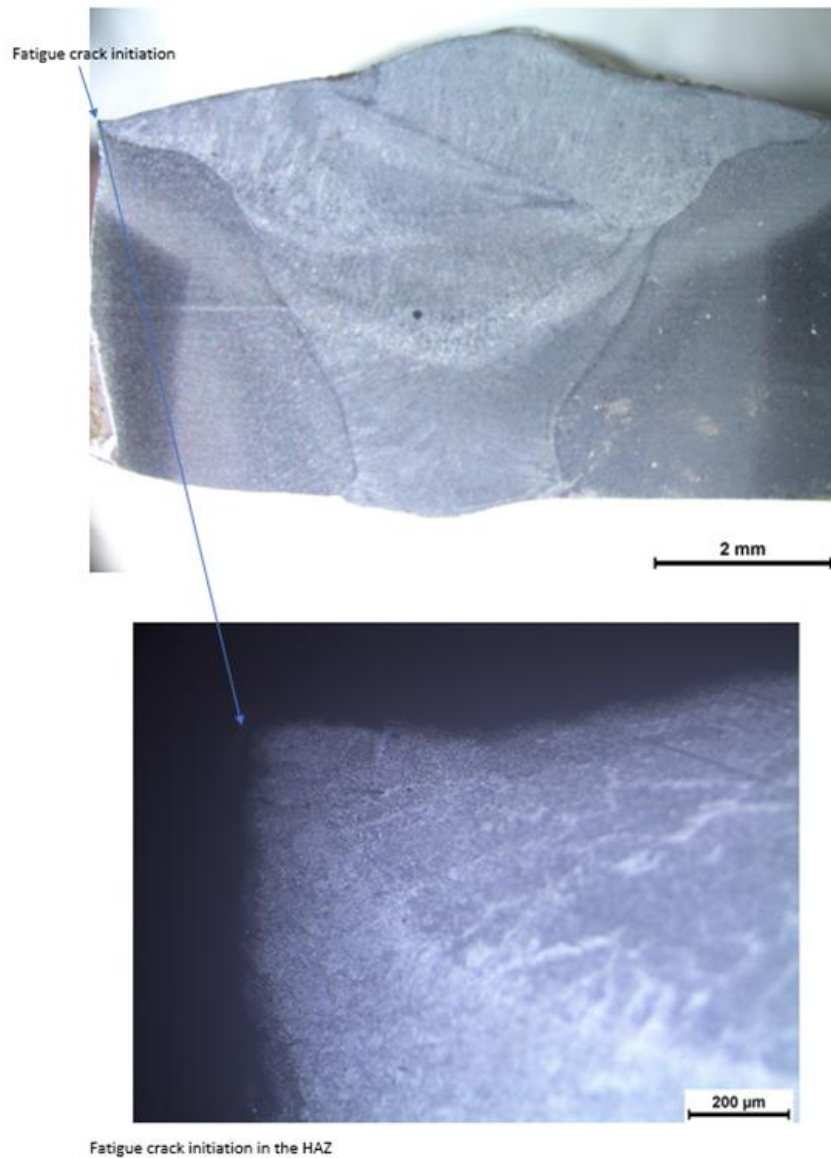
Fatigue crack initiation in HAZ of S355J2+N material
